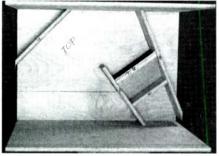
Inside view of the throat manifold with attached front and back panels.
